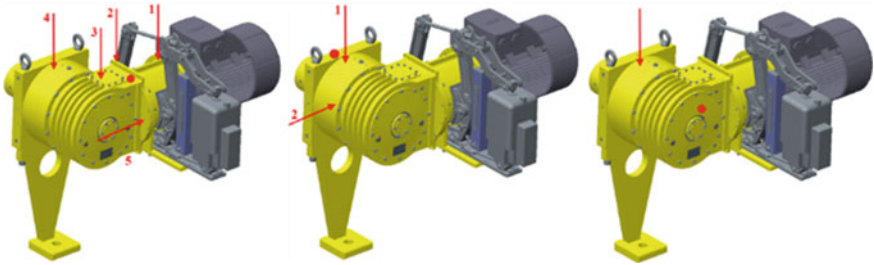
Test 1, Test 2, Test 3 (from left to right)
